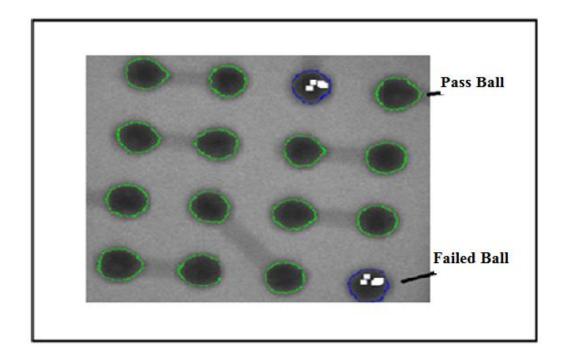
Shows a test vehicle with passed and failed bumps in a PCB assembly.
